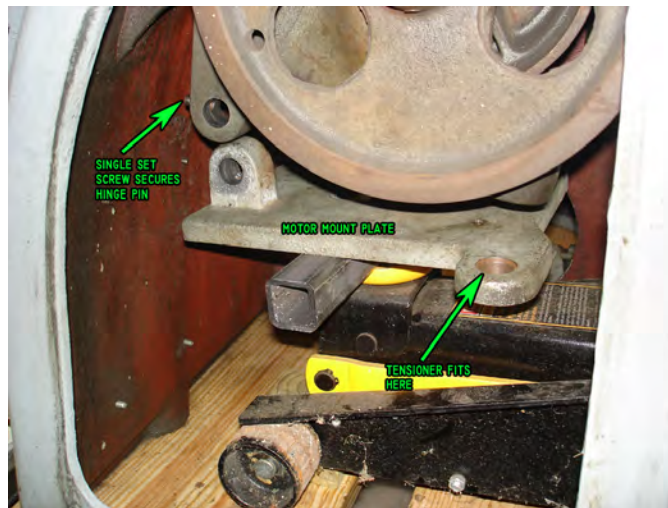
Removing the motor mounting plate from beneath the countershaft assembly.
